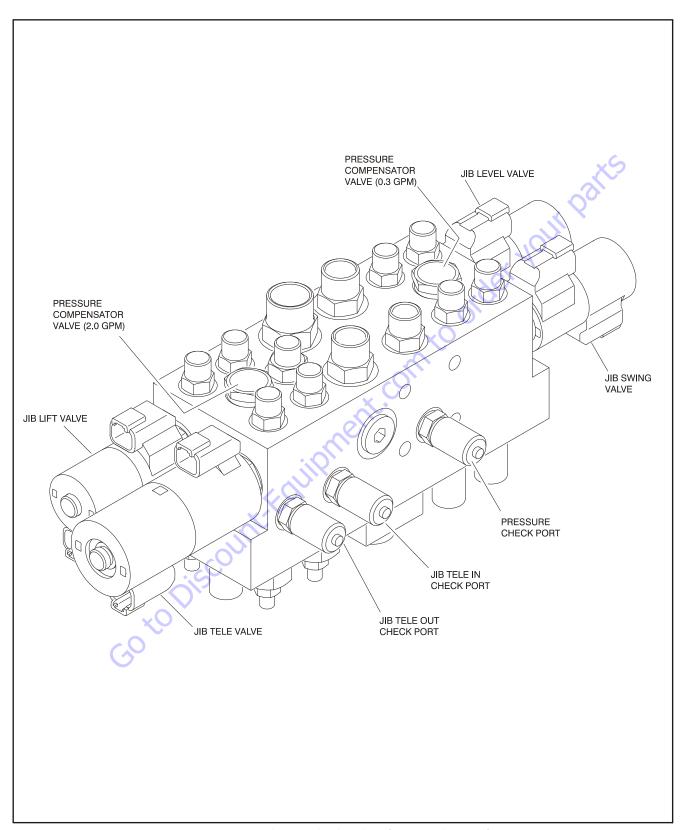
Jib Control Valve Identification - Sheet 1 of 2
